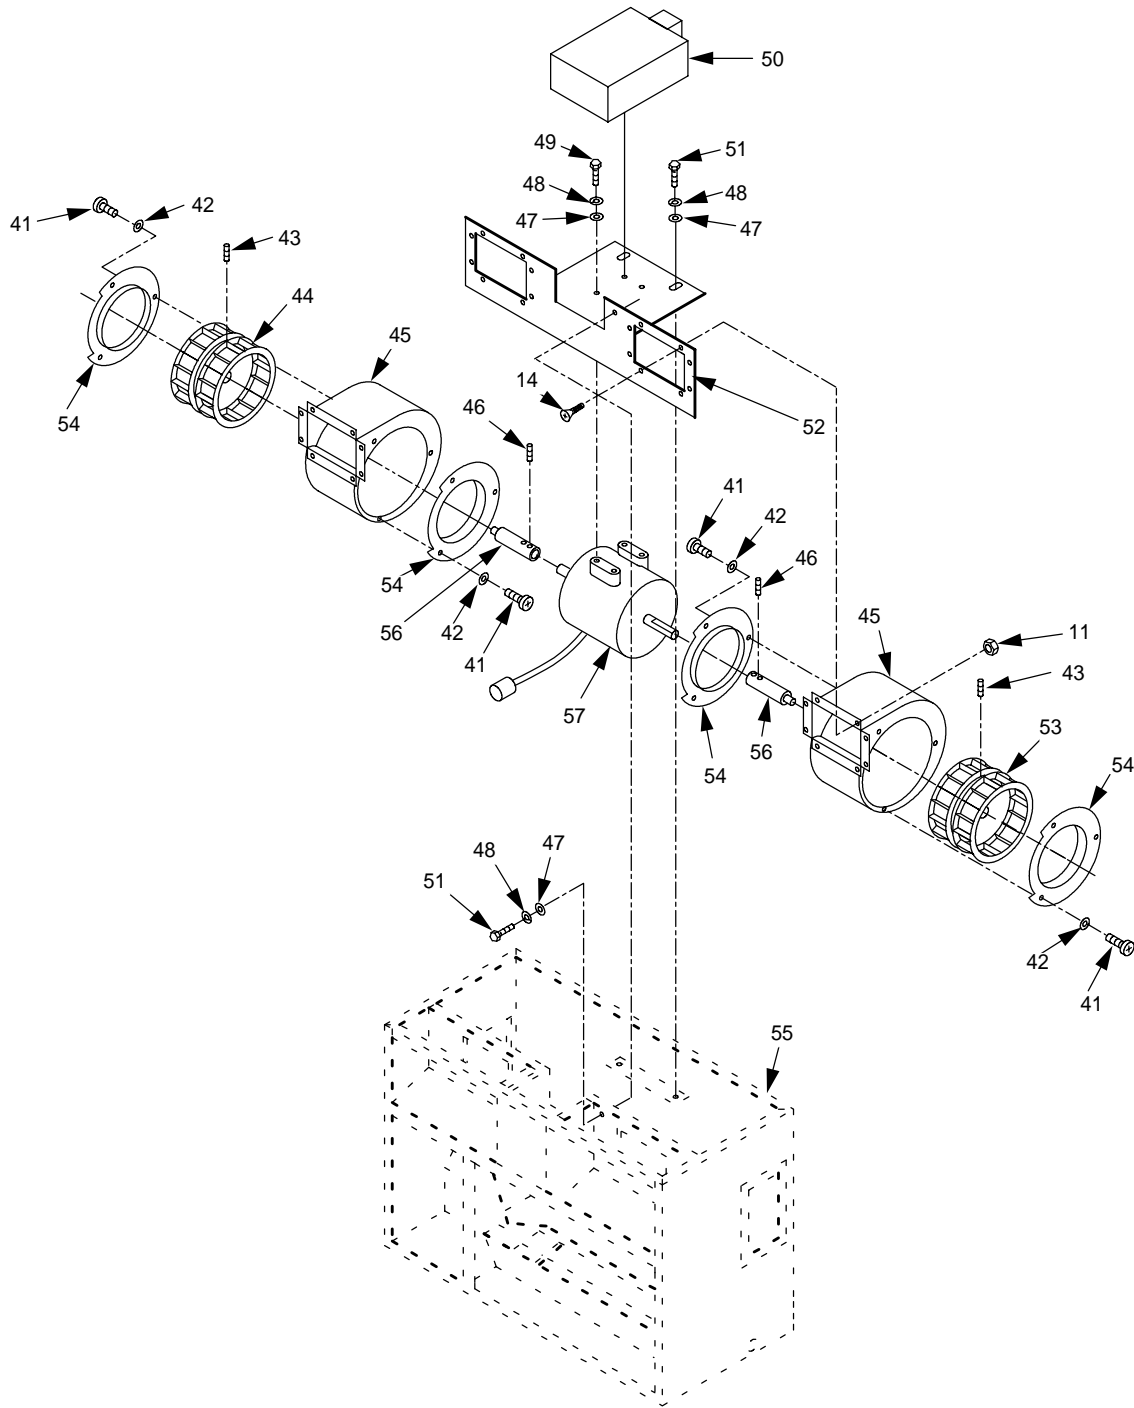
Evaporator Assembly (Sheet 3 of 4)
